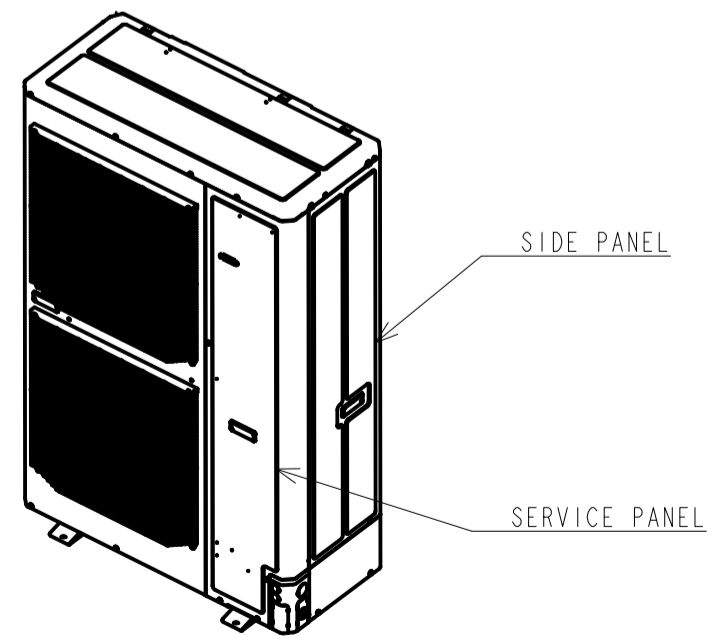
OVERALL VIEW OF THE TARGET MACHINE
